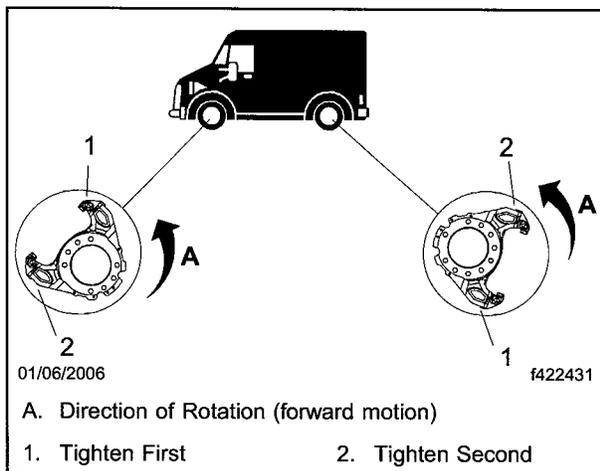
, Tightening Sequence for Caliper Mounting Bolts, Left Side
